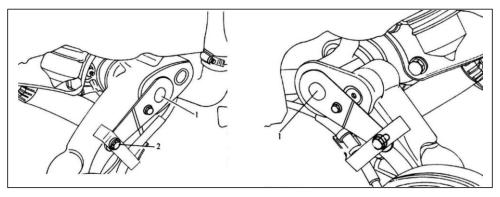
Tighten Rocker Arm Fixing Bolt
